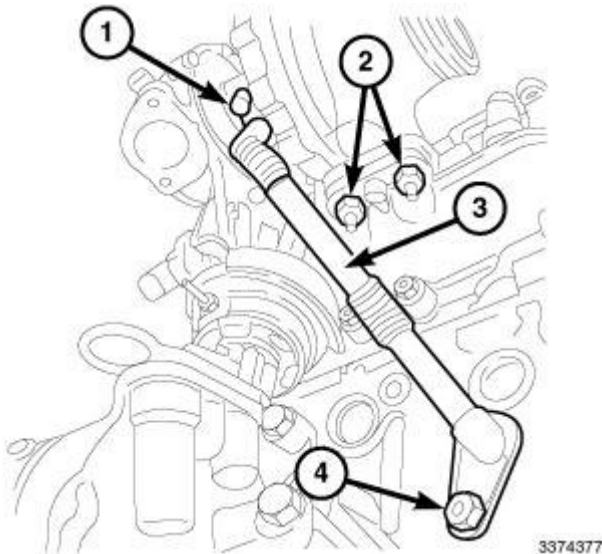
Turbocharger, Oil Send And Return Line & Fasteners
